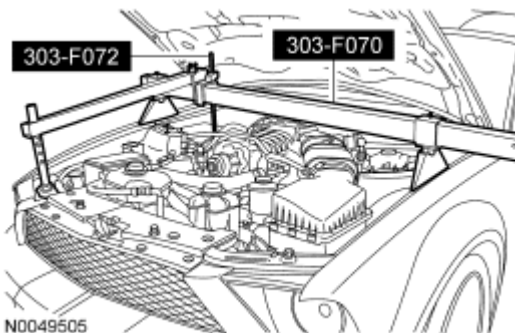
Lowering Engine Onto Engine Support Insulator Using Special Tools (303-F072) & (303-F070)
